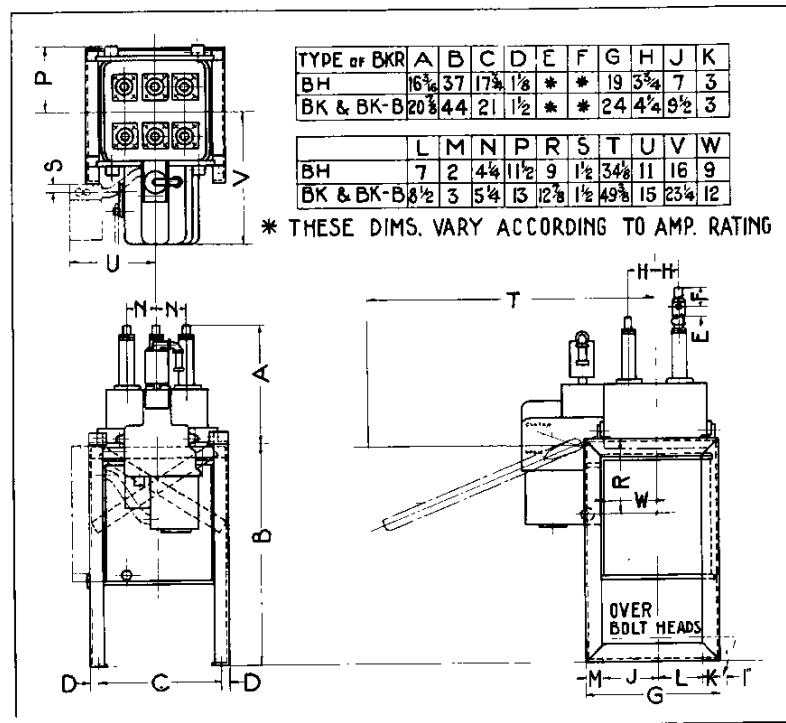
Types BH, BK and BK-B Oil Circuit Breakers, Frame Mounted, Solenoid Operated, General Dimensions.
